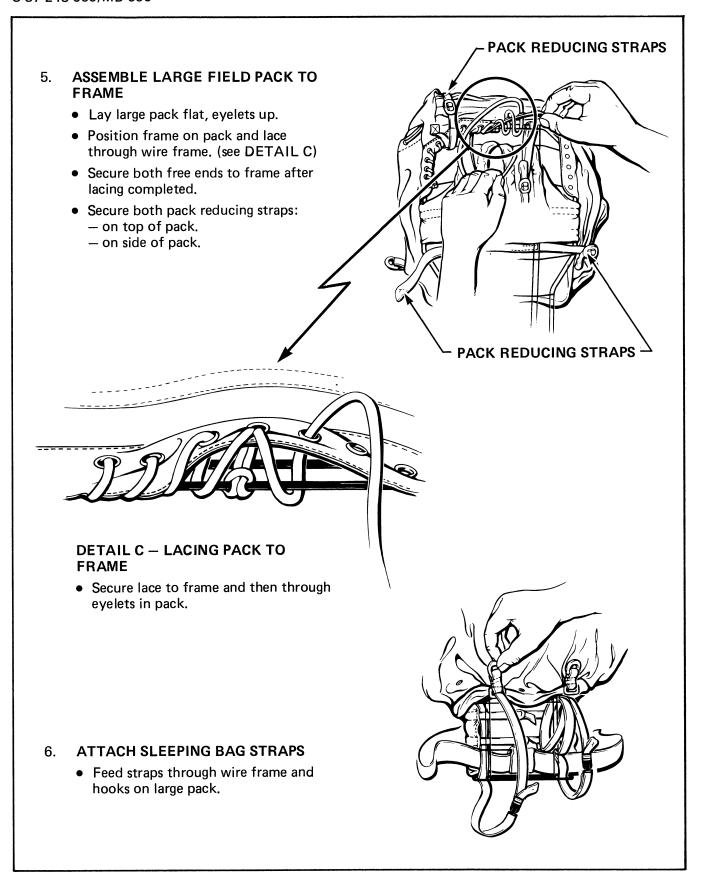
(Sheet 4 of 5) Large Field Pack/Frame — Assembly Steps
